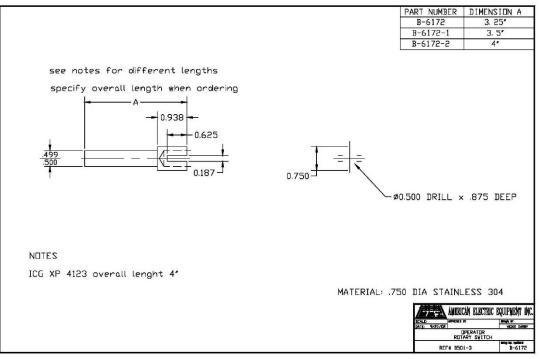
XP Enclosure Application OEM Switch Shaft Drawing
